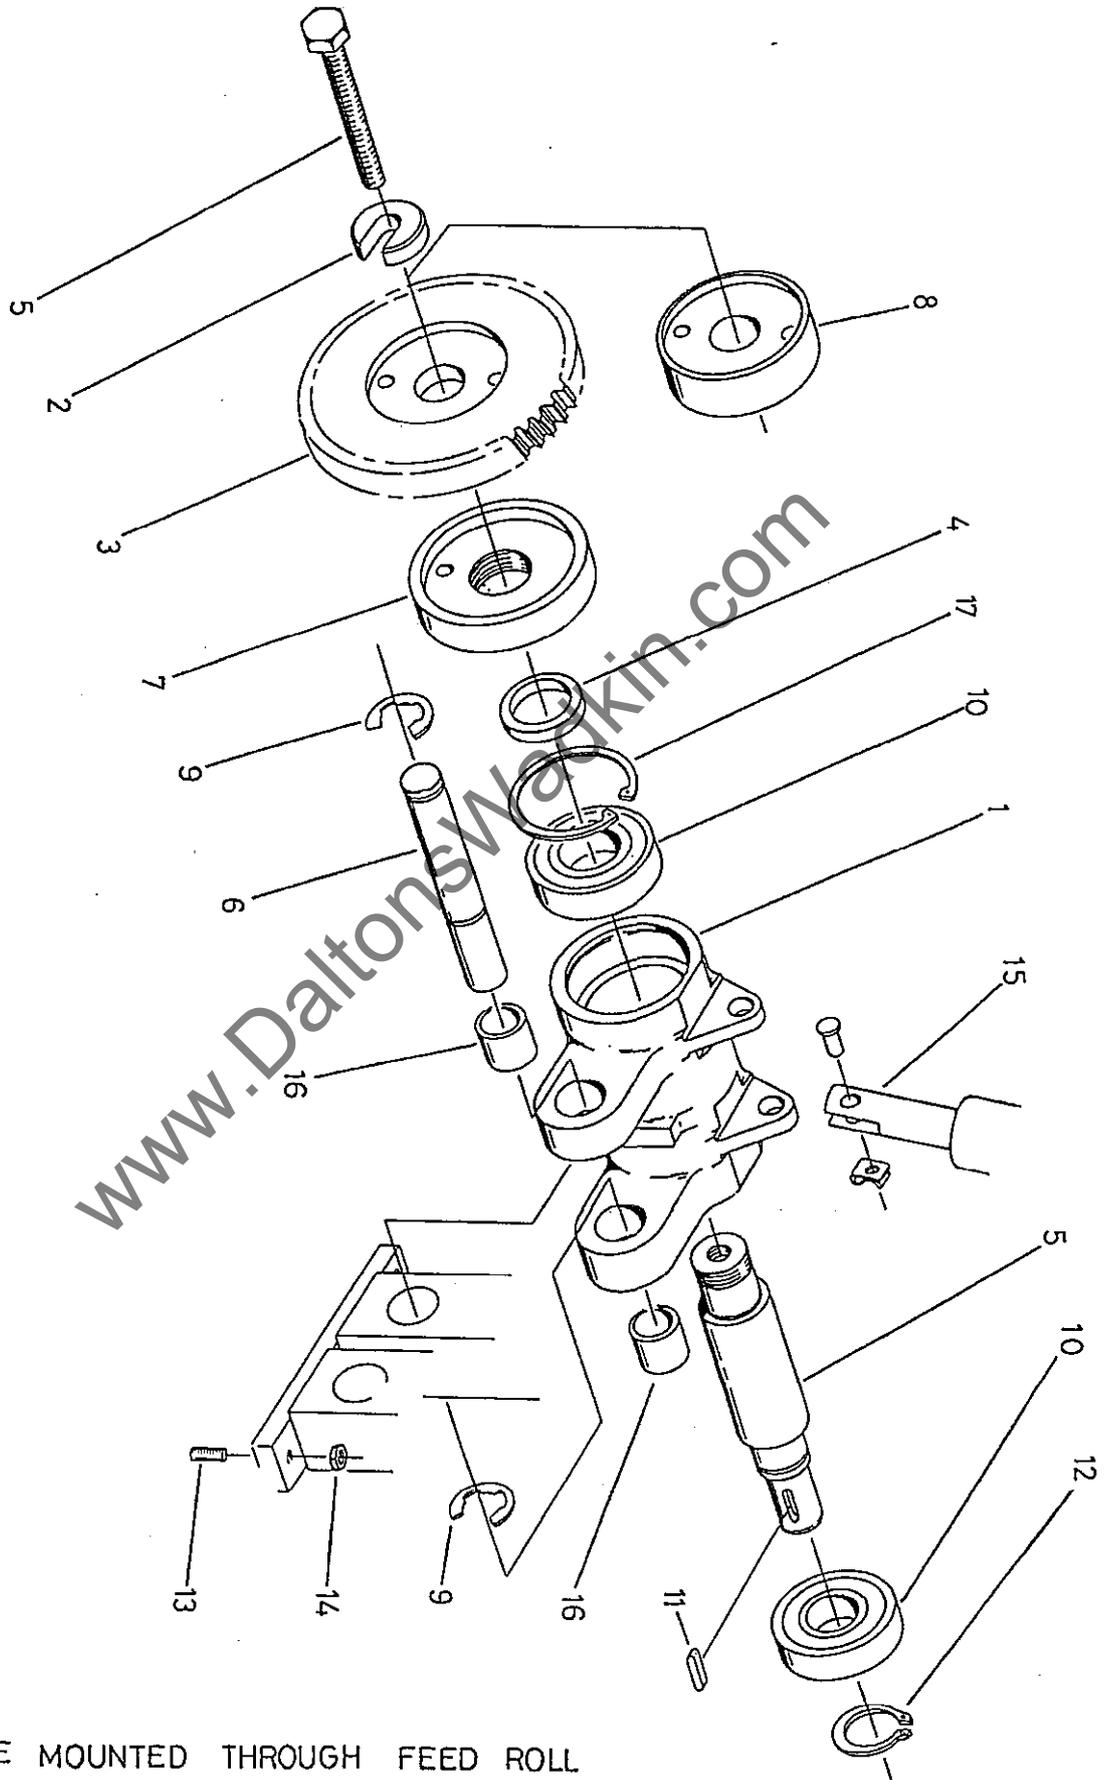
FLANGE MOUNTED THROUGH FEED ROLL
